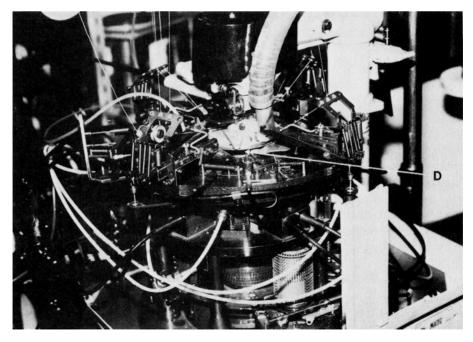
Close-up view of the knitting head of a 4-feeder seamless hose machine (D = Dial) [Walter Bullwer].
